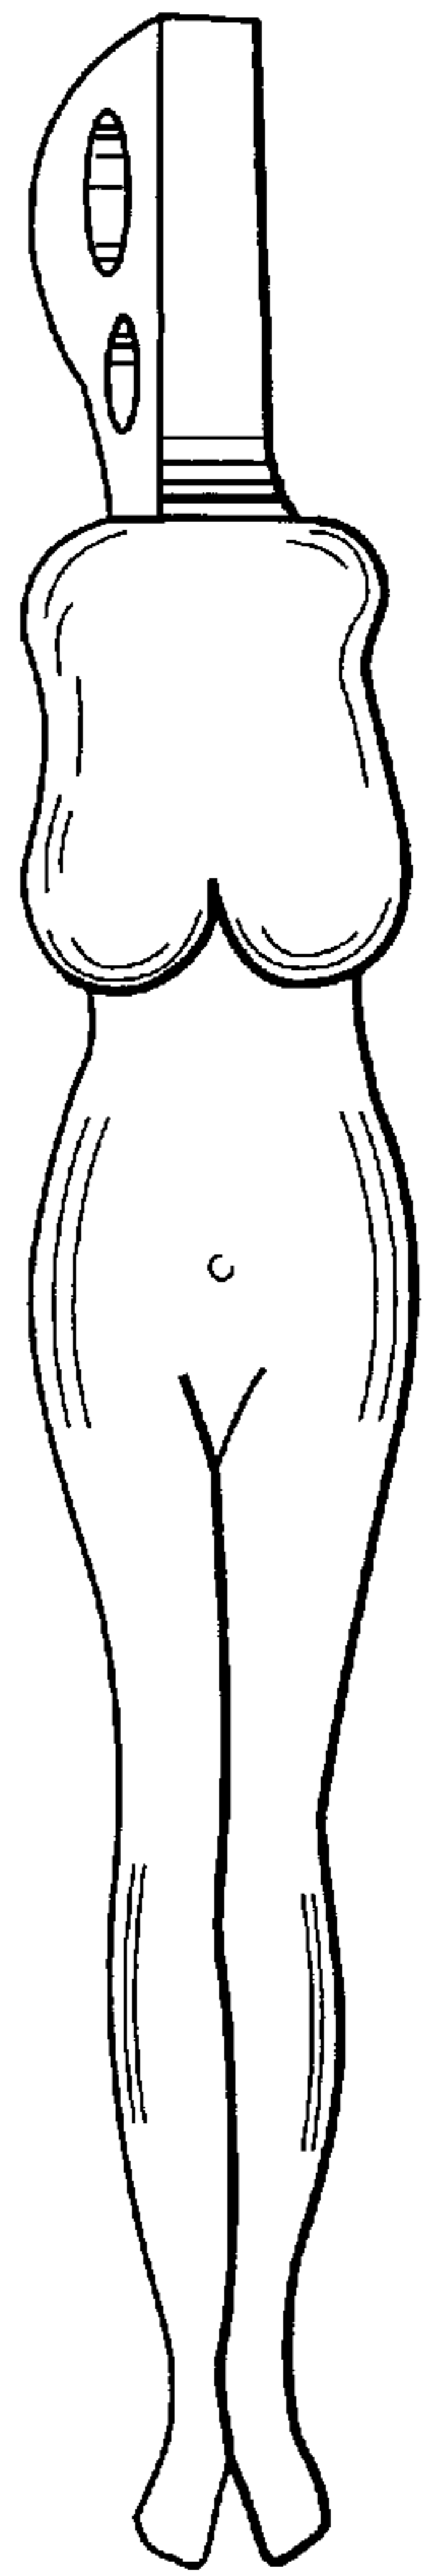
is a right side elevational view of a motorcycle brake or clutch lever of the present invention;
